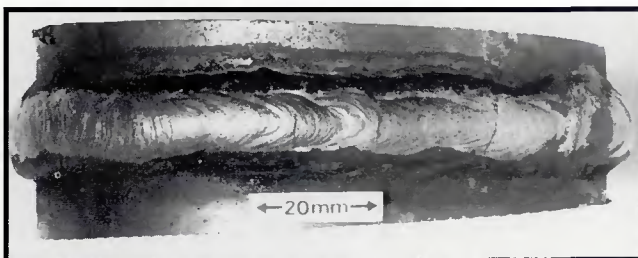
View of test weld: 1 kJ/mm and 100°C preheat.
